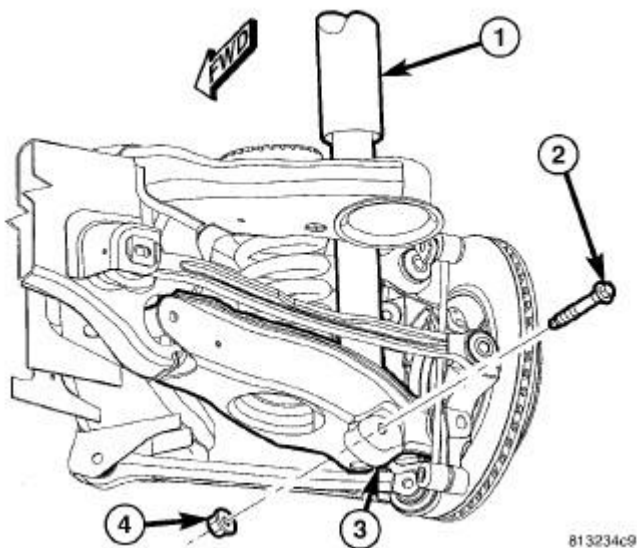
Shock Absorber Lower Mounting Bolt & Nut
